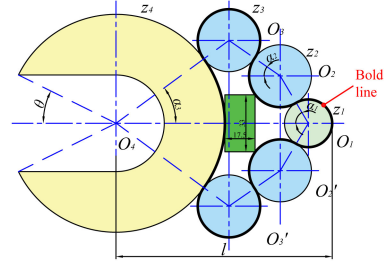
Installation parameters of the open gear set. For each gear, a part of the reference circle inside or outside the hexagon $O_1O_2O_3O_4O'_3O'_2$ is selected and marked in bold. The bold line marked in the figure represents the curve composed of the bold parts of the reference circles of all the gears.
